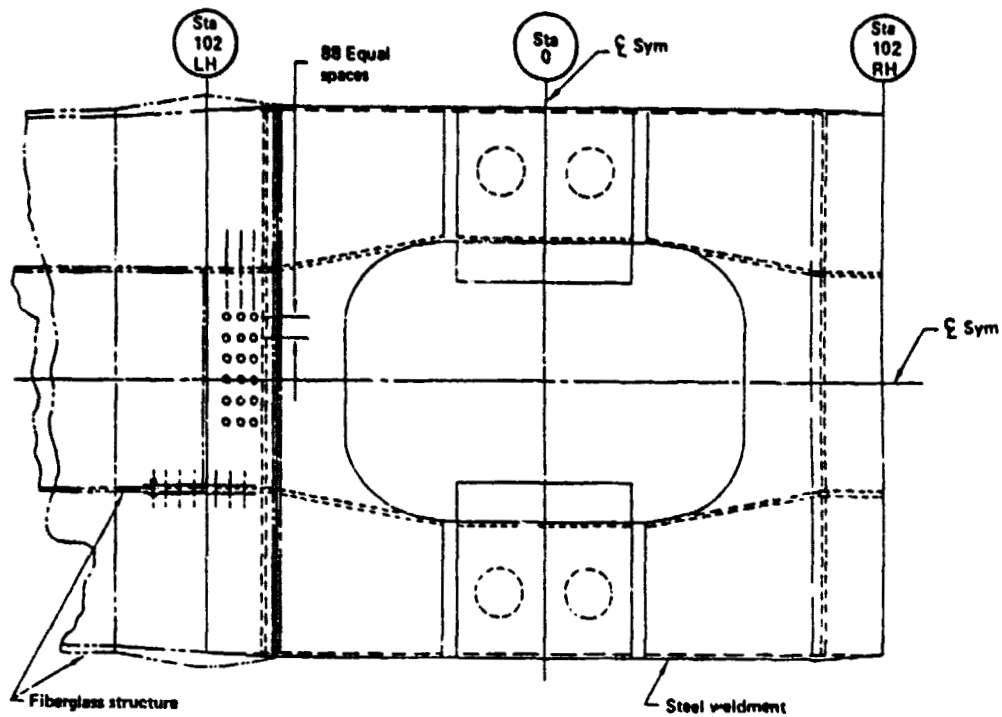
Composite Rotor - Steel Hub & Field Joint
